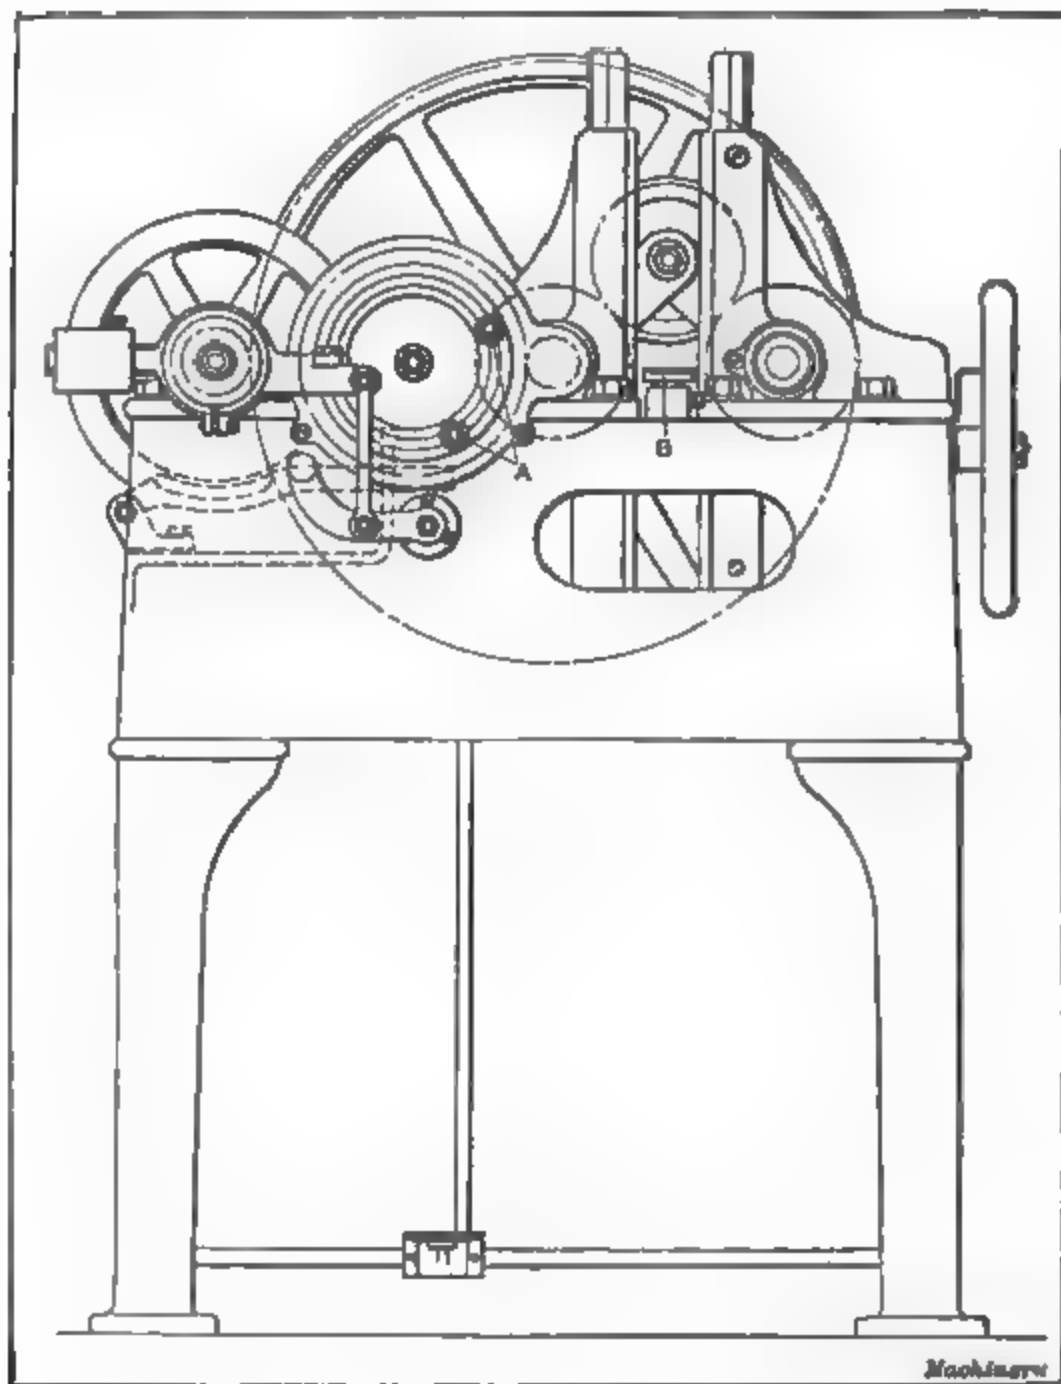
Machine for Making Rolled Forgings, built by the Simonds Rolling Machine Co., Fitchburg, Mass., Some Twenty-Five Years ago
